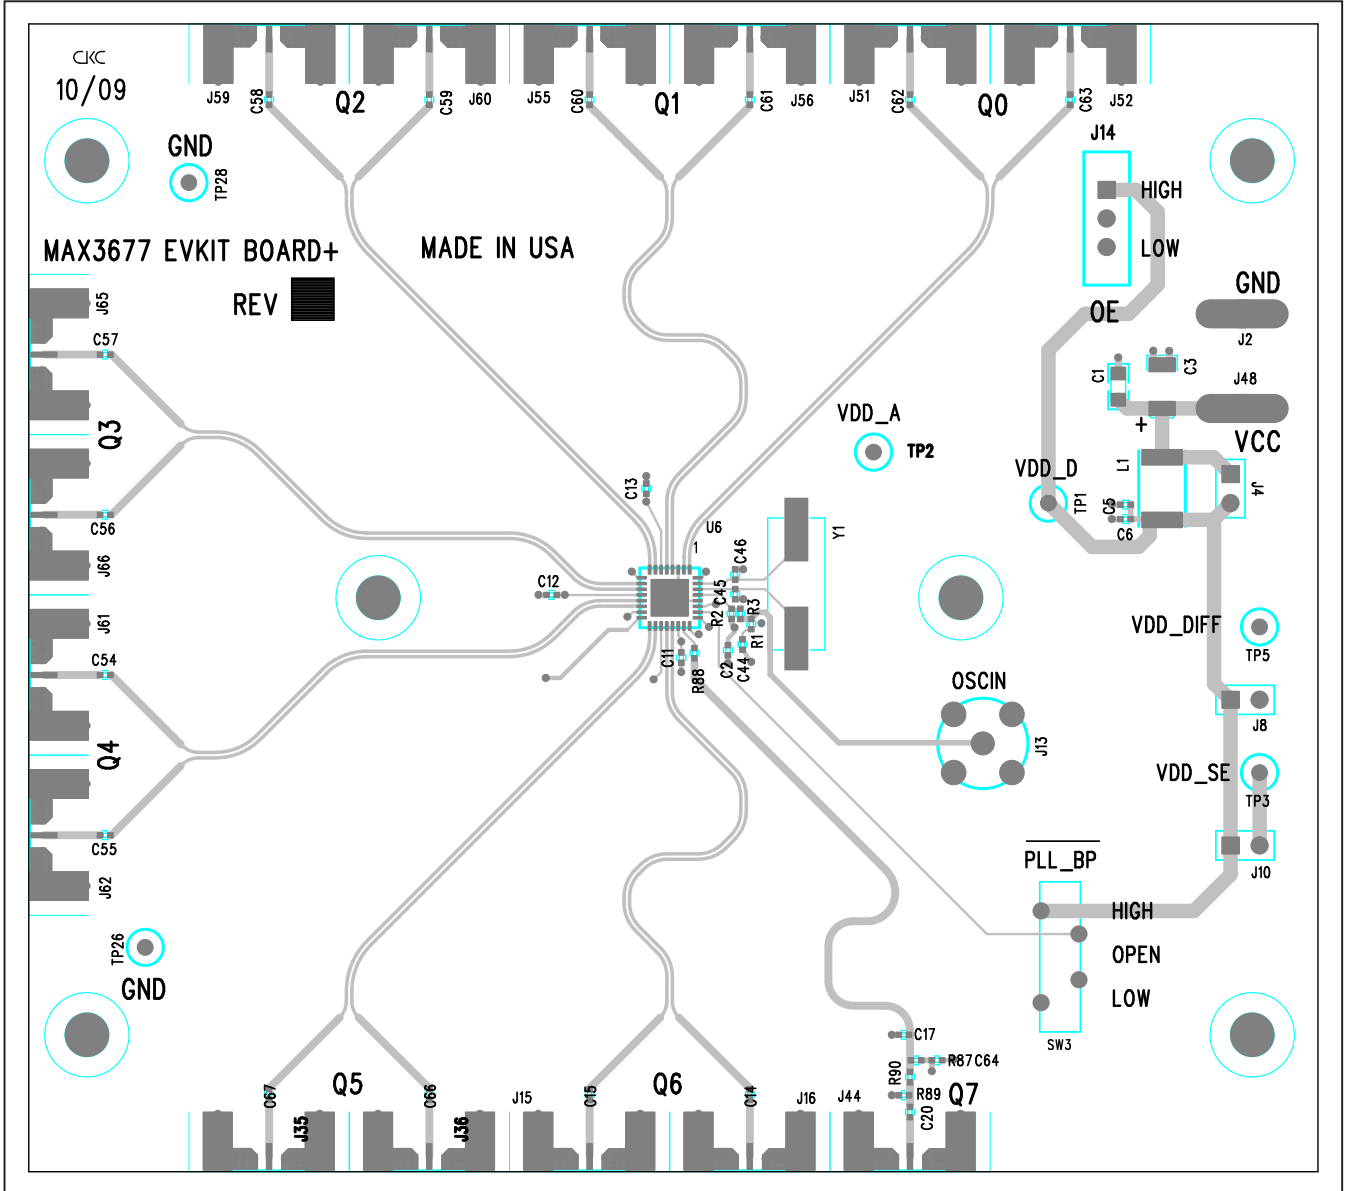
MAX3677 EV Kit Component Placement Guide—Component Side
